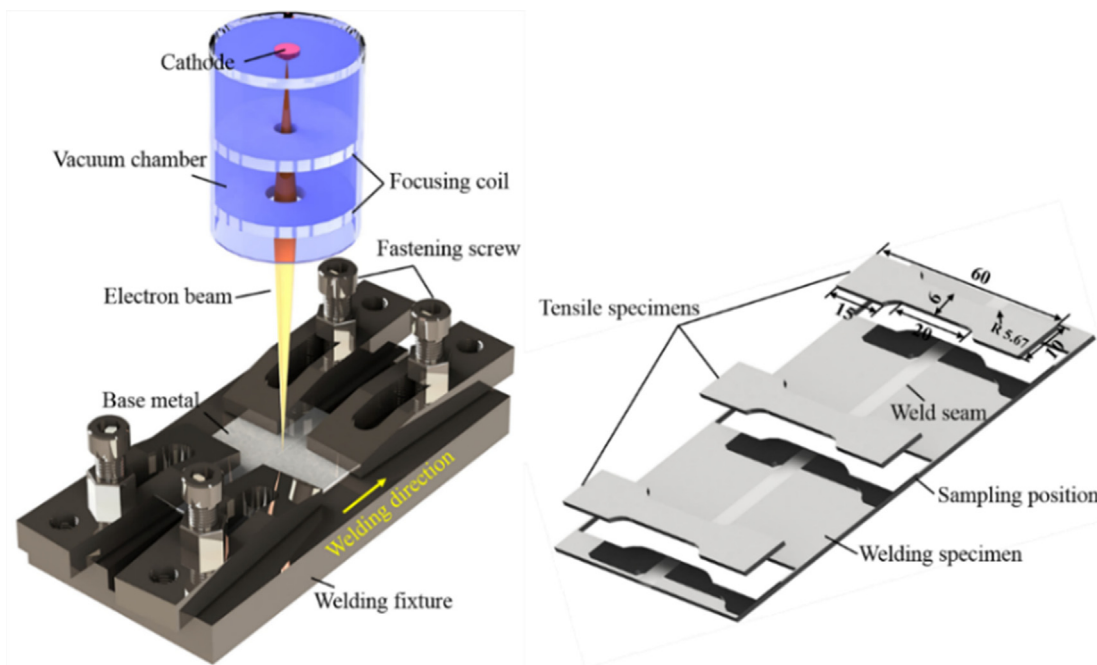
Electron beam welding and test samples diagram. (a) Welding samples assembly diagram. (b) The size of test samples.
